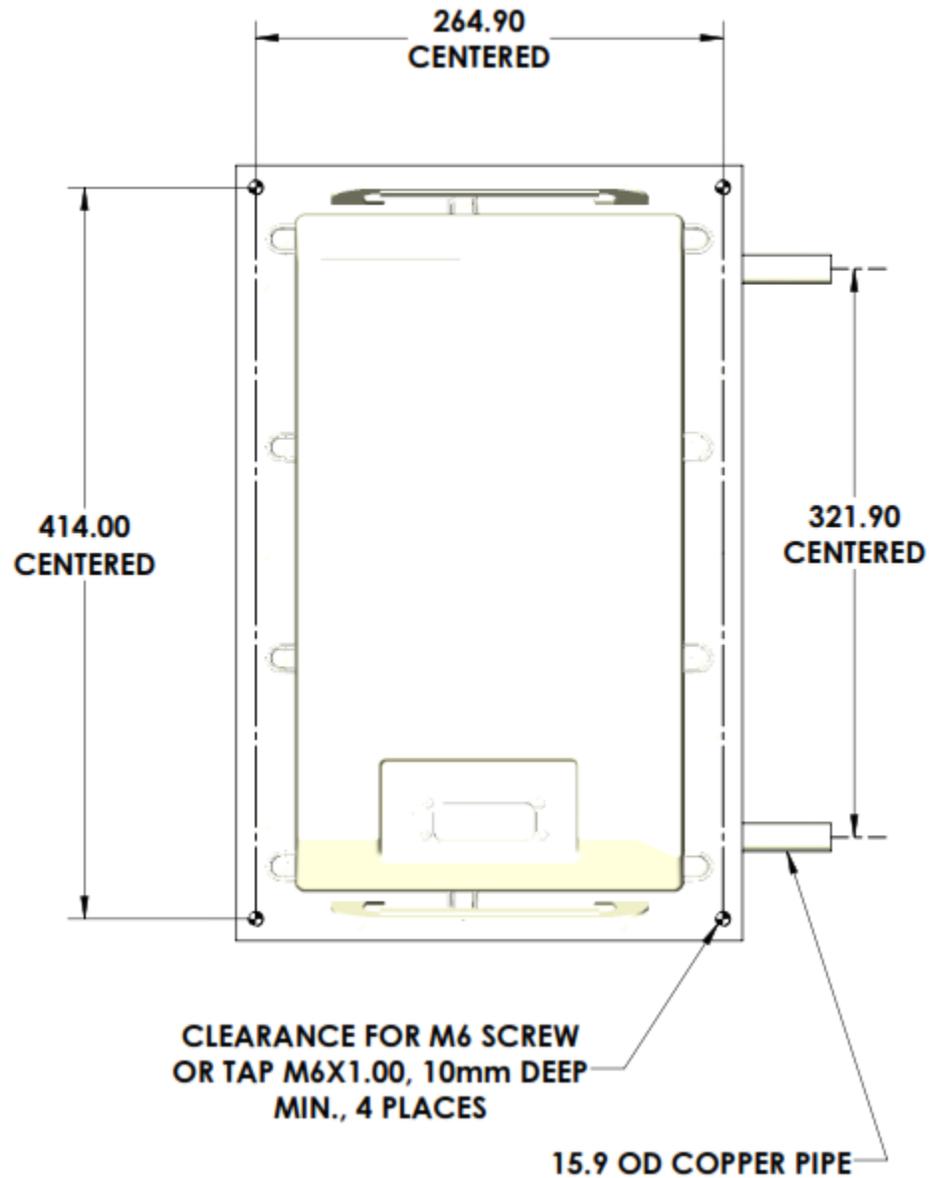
Mechanical Mounting Diagram, Models OZip-RL
